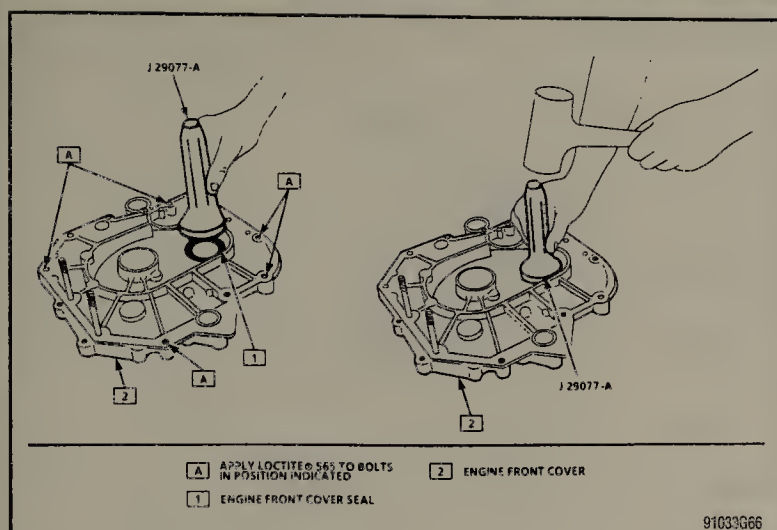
Removing the timing chain front cover seal, using the proper tools
